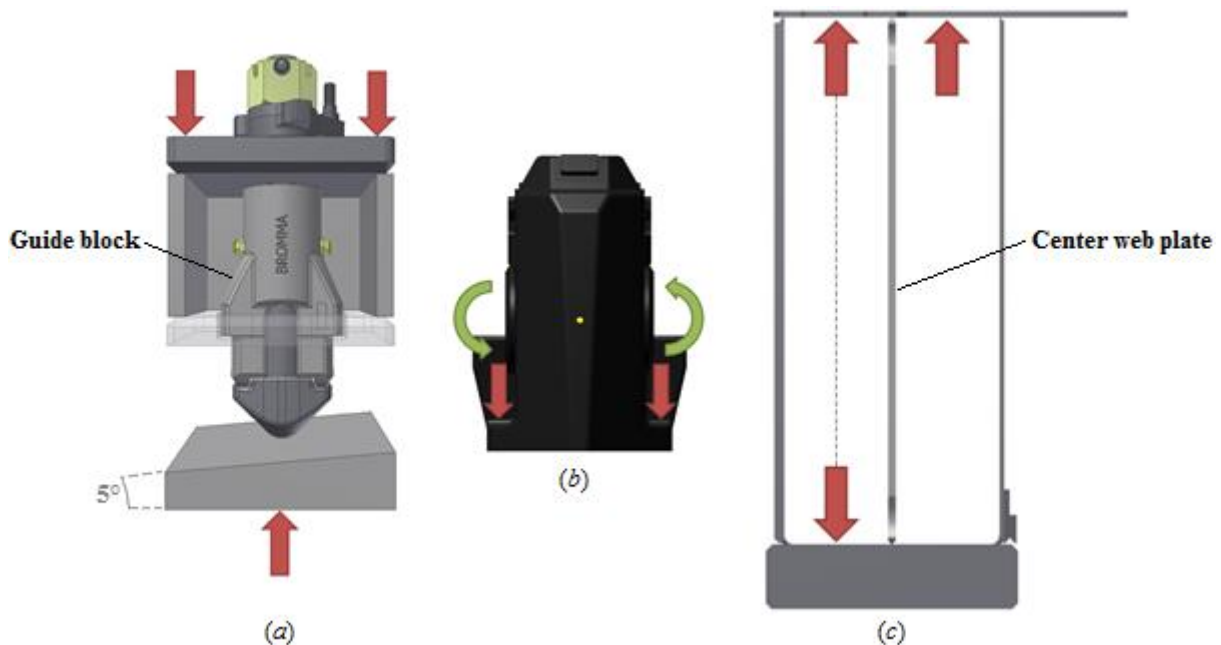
Load cases for the three selected spreader components a) Twistlock assembly substructure b) Gearbox housing c) Center web plate substructure
